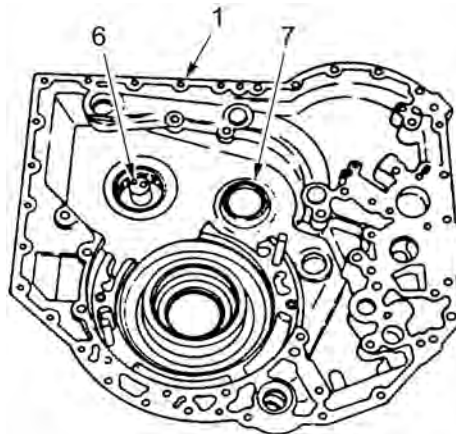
Bearing Race and Steer Idler Bearing Installation.
